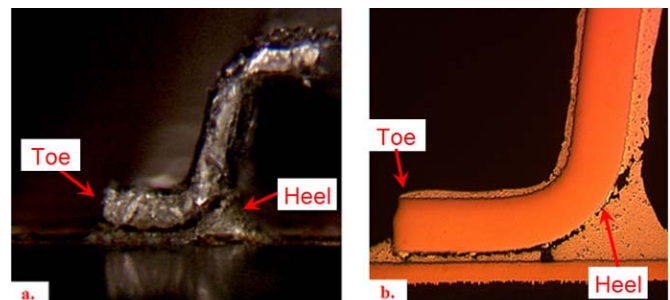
QFP fracture of SAC305 on High T_g board a) optically and b) cross section
